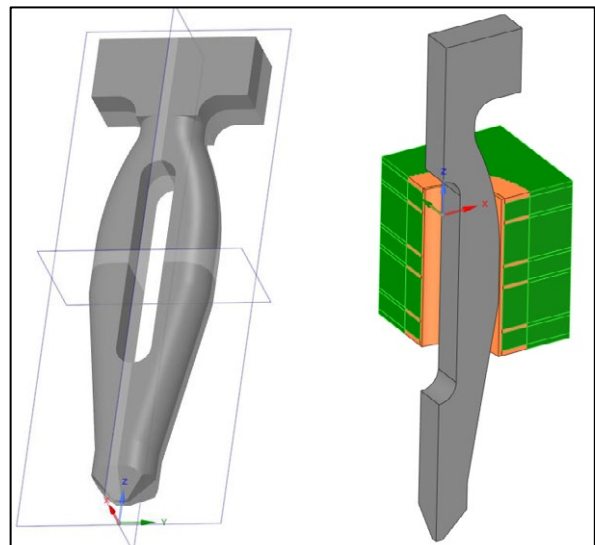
Pin geometry (left) and the assembly Pin-PCB (right)
